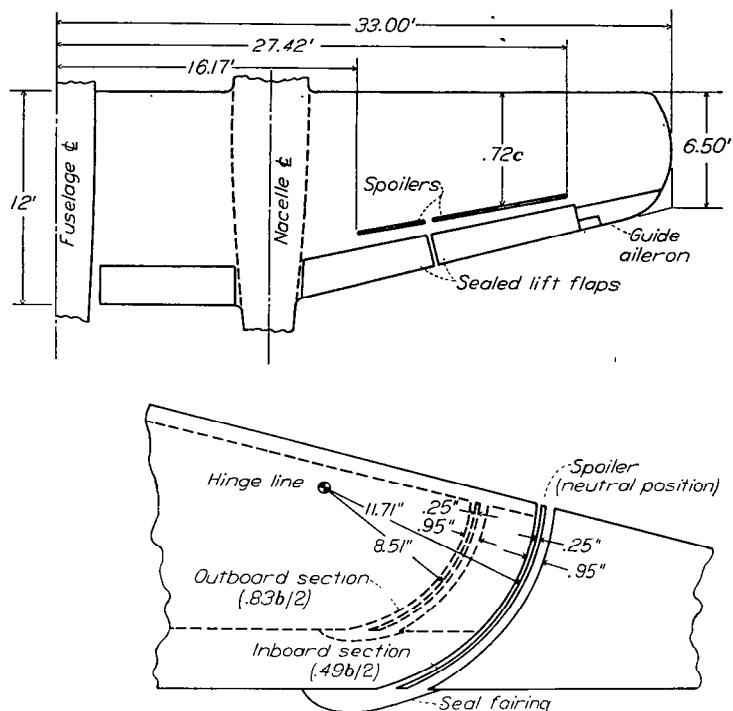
Wing plan form and wing section showing spoiler arrangement on P-61 airplane
